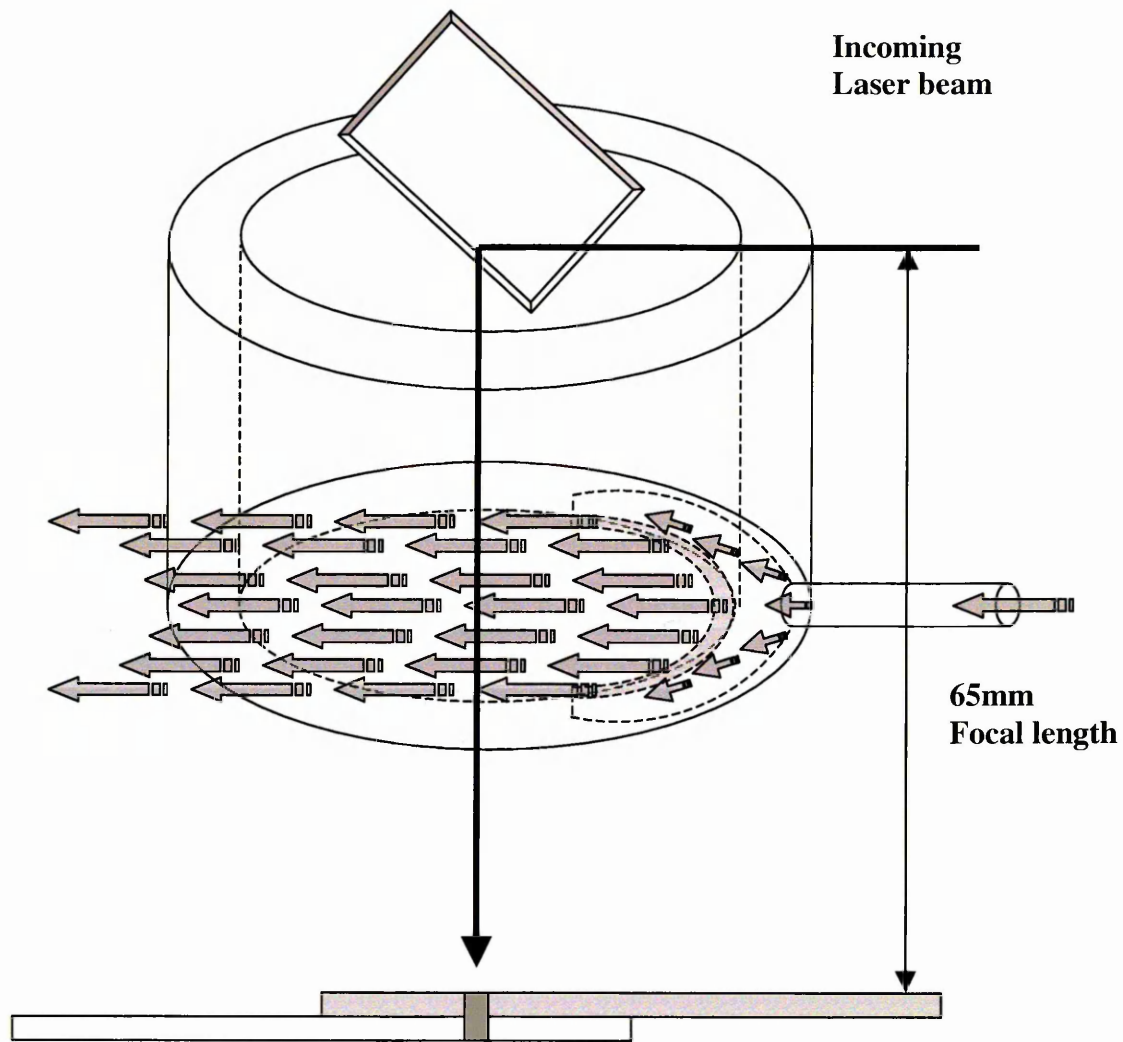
Schematic diagram showing a typical air knife assembly used to protect the focusing mirror when welding zinc-coated steel with a small focal length
